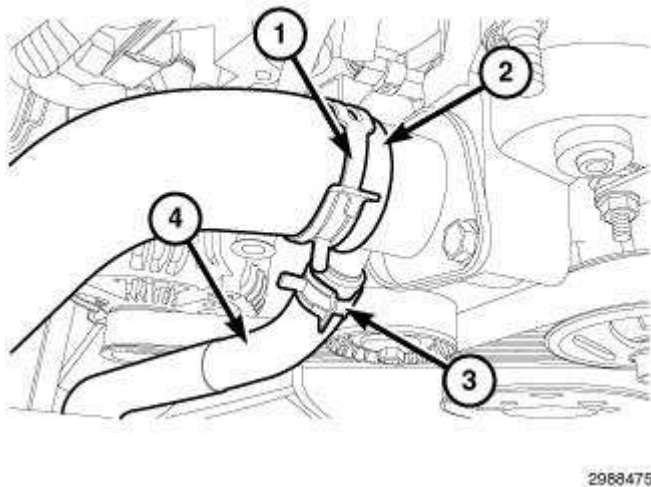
Upper Radiator Hose, Clamp, Oil Cooler Return Line Hose & Clamp
